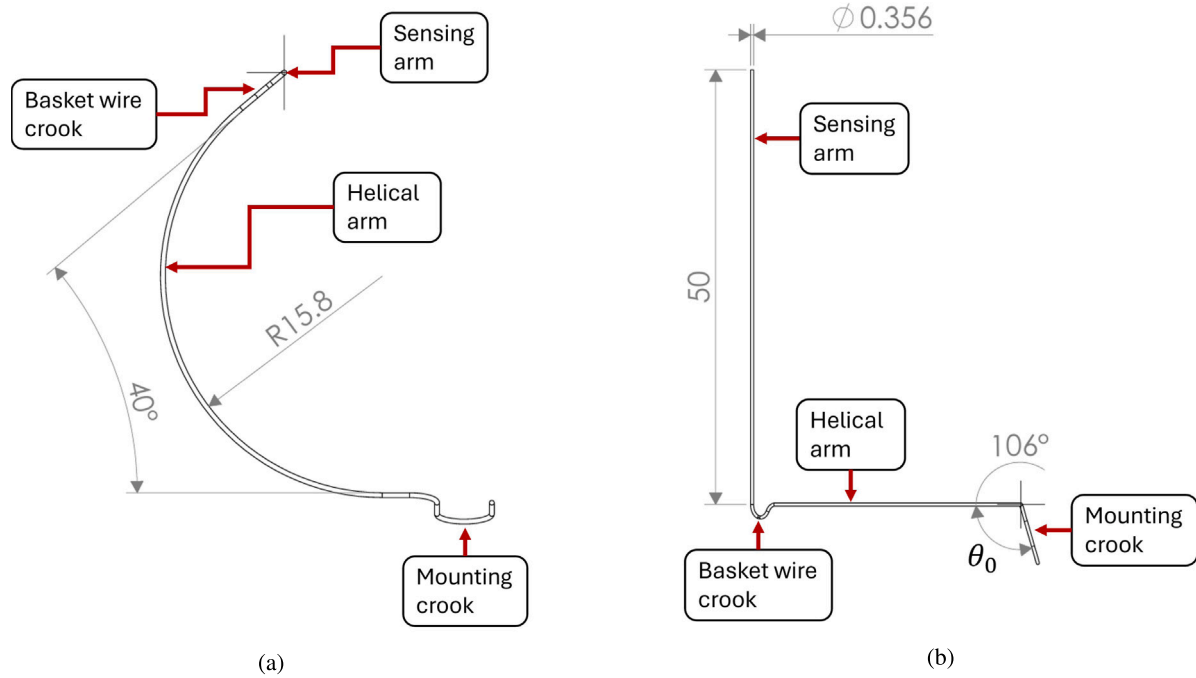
Fig. 4(a) shows a top view and Fig. 4(b) shows a side view of the spring wire with key dimensions used in the sensors built for this work.
